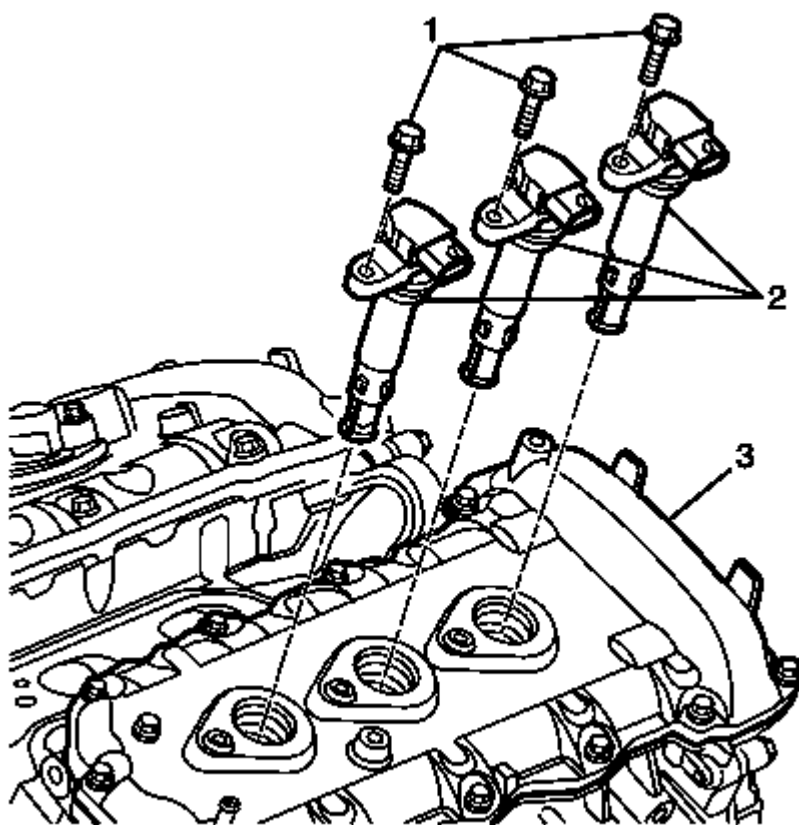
Identifying Ignition Coil To Camshaft Cover Retaining Bolts
